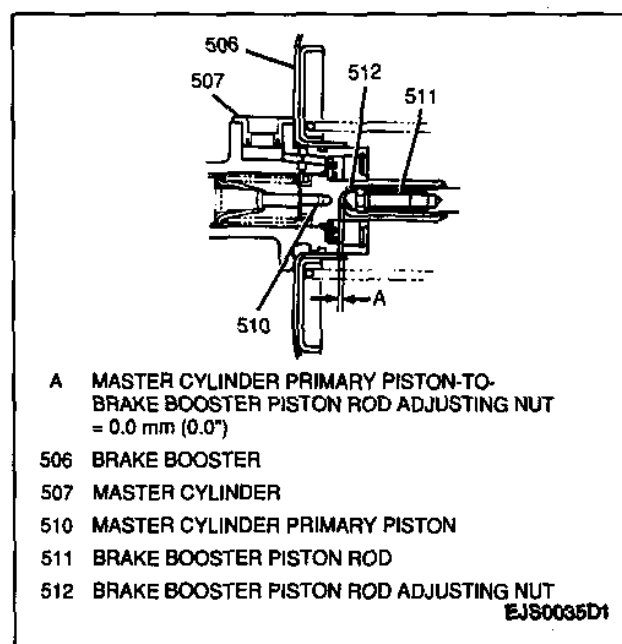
Master Cylinder Primary Piston-to-Brake Booster Piston Rod Adjusting Nut
